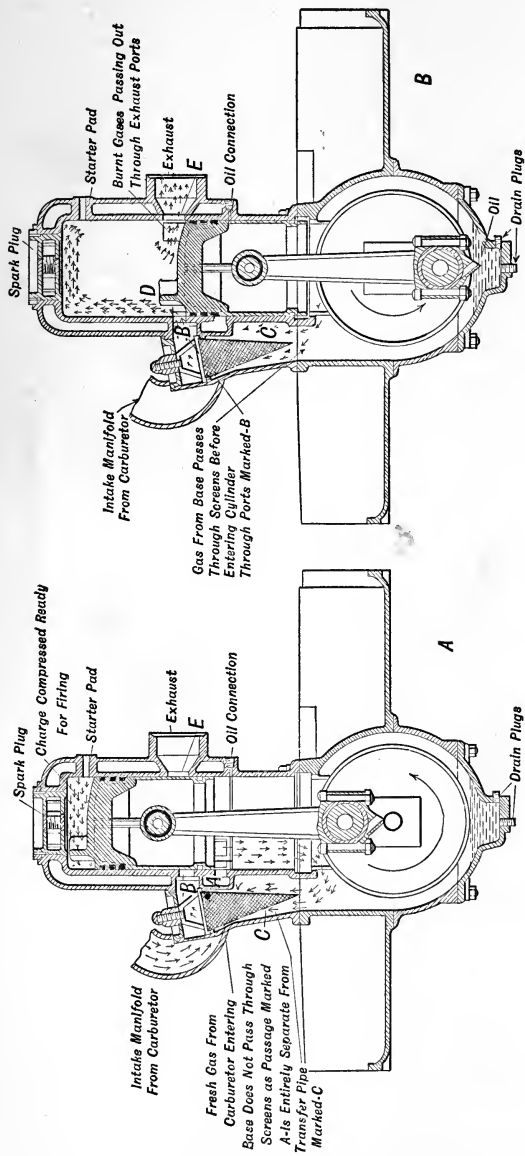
Sectional View of Amplex Two-Cycle Motor Cylinder. A—Piston at Top of Stroke, Ready to Receive Impact Due to Gas Explosion. B—Piston at Bottom of Stroke. Note Gas Transfer from Engine Base and Expulsion of Burned Gases.
